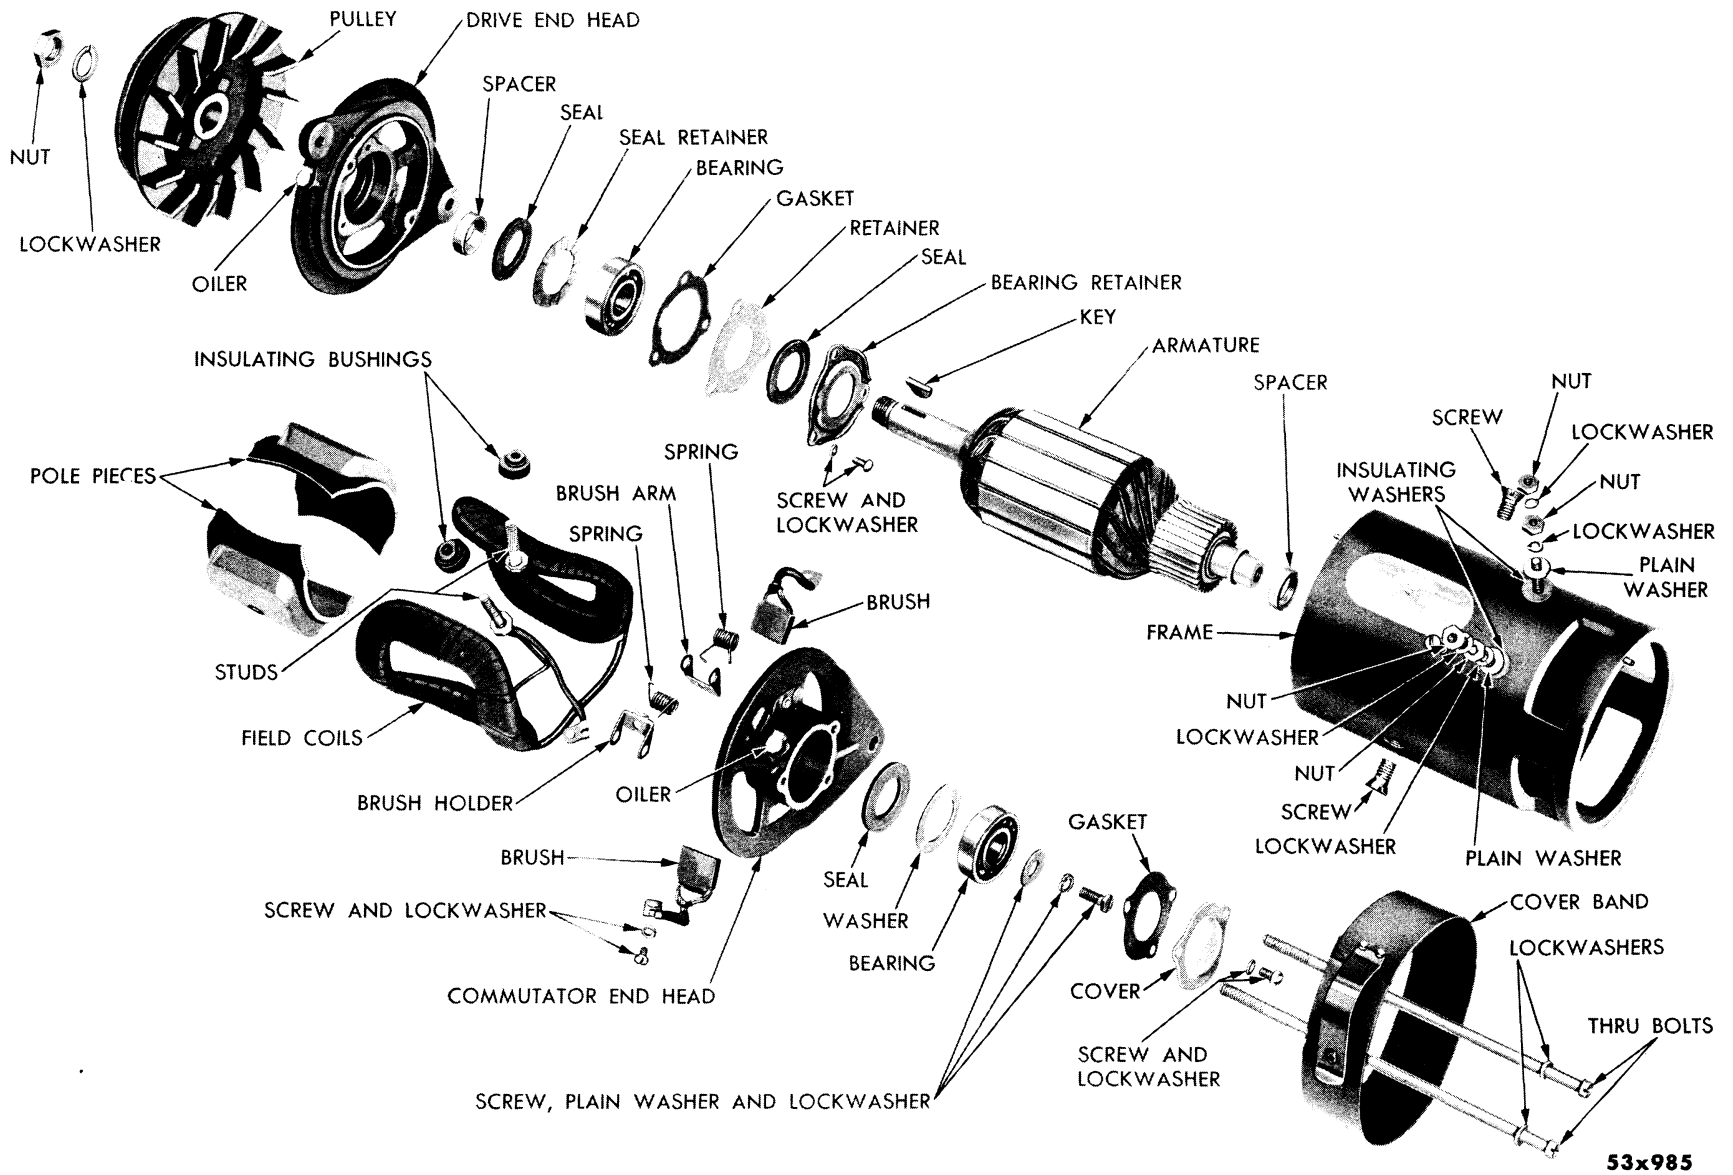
Generator Type GGU (With Car Cooling) (Without Power Steering)
